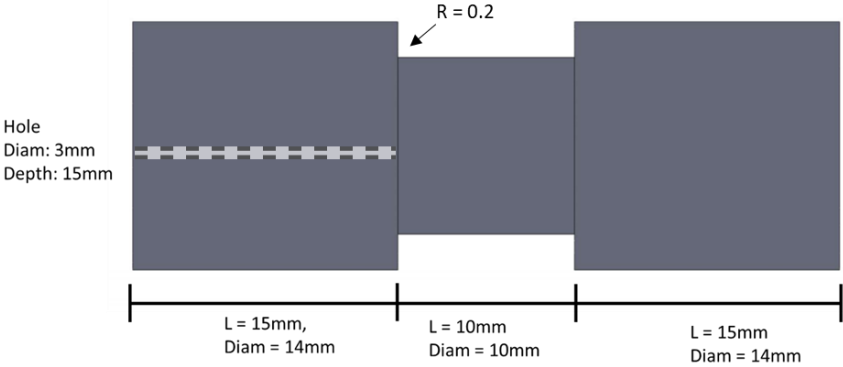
An illustration of the geometry of the torsion sample with dimensions.
